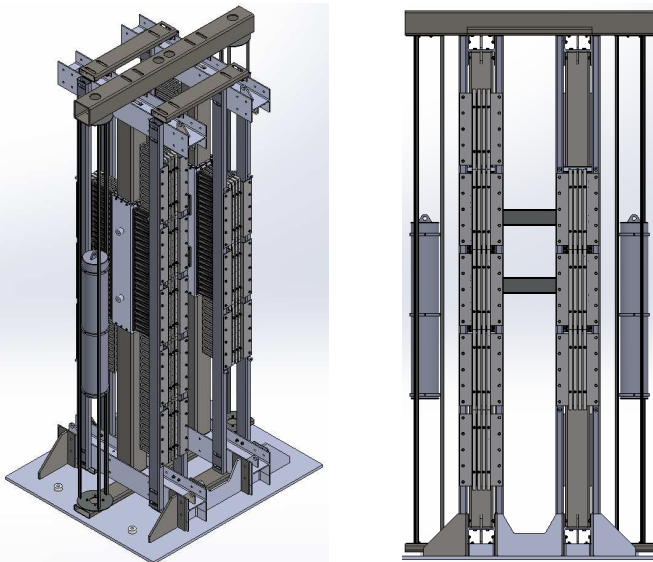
Proposed test rig construction. Left: Isometric view. Right: Side view showing counter weights either side and motor modules on left and generator module on the right.
